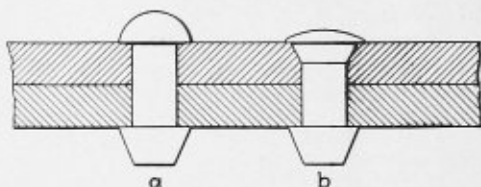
Snap Rivet. Fig. 2.—Raised Countersunk Rivet
